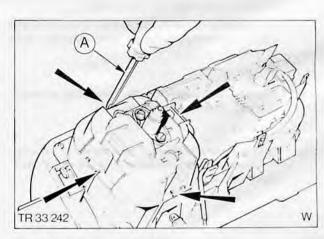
Securing speedo housing A – Screwdriver Screw locations arrowed
